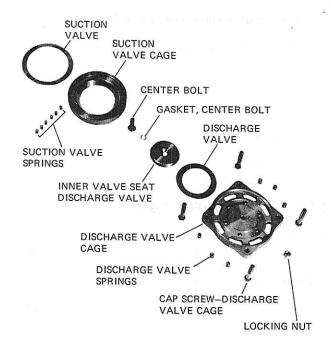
SUCTION AND DISCHARGE VALVES — EXPLODED VIEW (ORIGINAL DESIGN)
